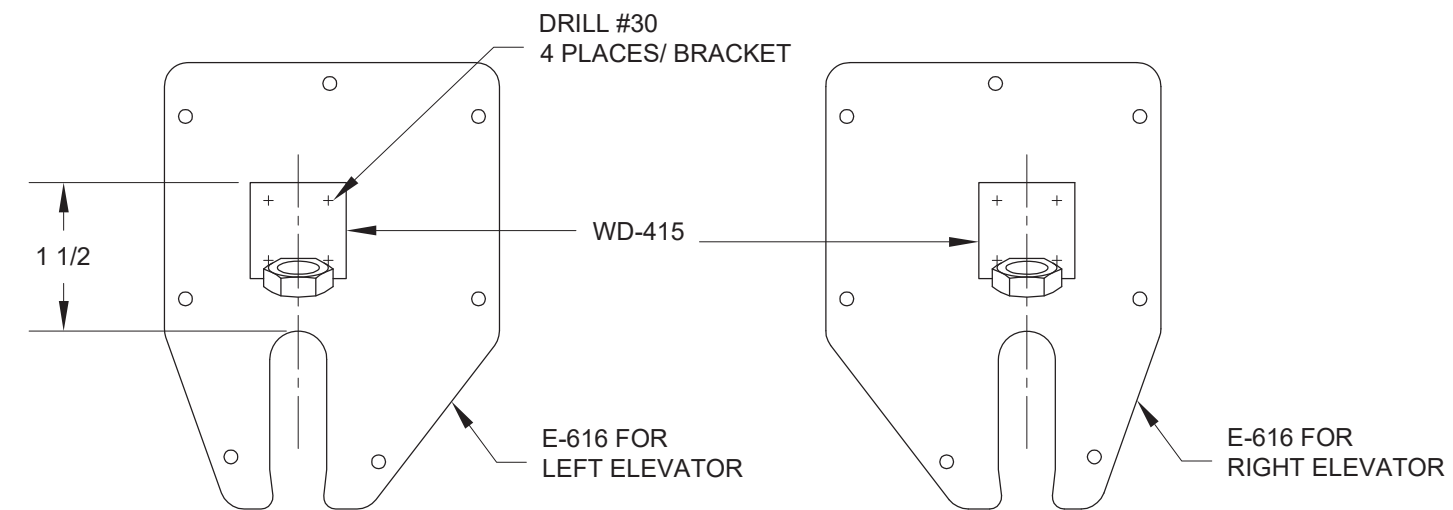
LOCATING AND DRILLING THE TRIM CABLE ANCHOR BRACKETS
